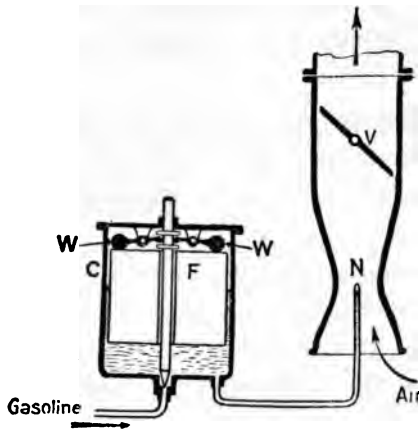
Carbureter. *C*, Chamber which receives the gasoline.
